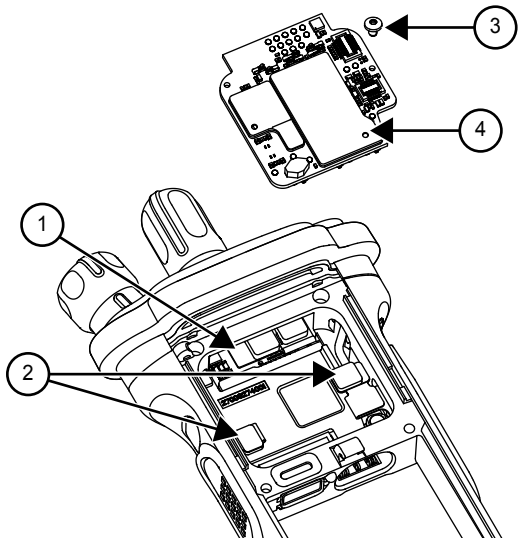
Remove Flex Connectors and Expansion Board Assembly - APX 8000XE
